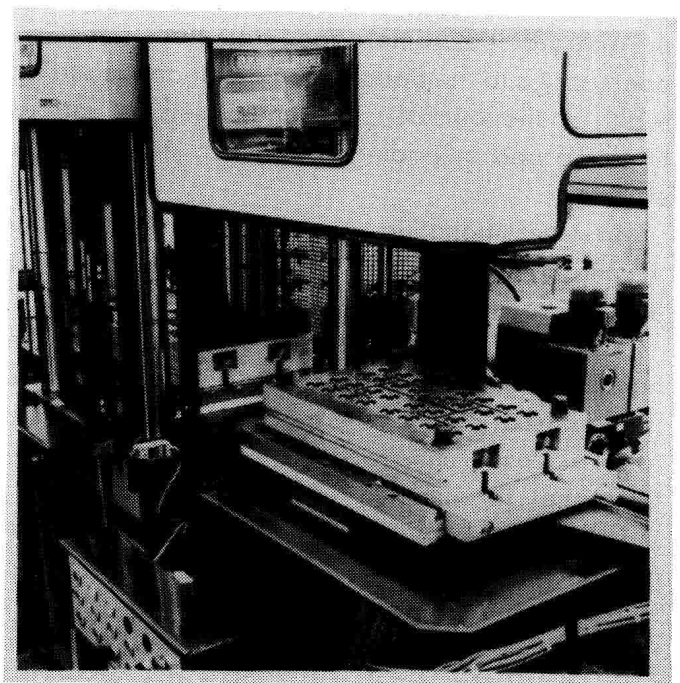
2-sided sliding table for shuttling of 2 bottom mould halves
